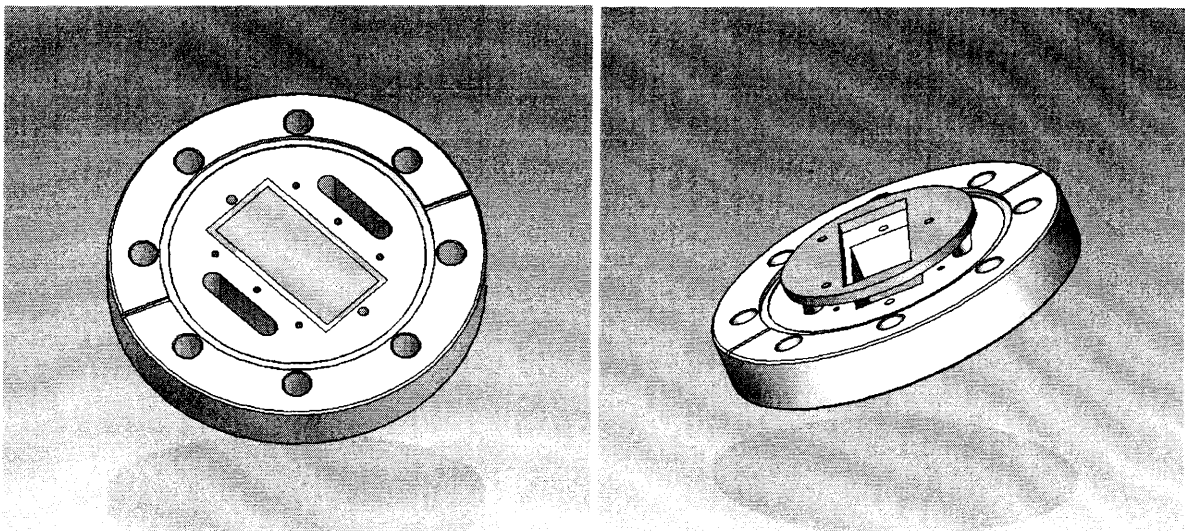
Filter holder assembly views front (left) and back (right). The filter holder is seen in the front view, while the blank is seen in the back view. The six regularly spaced holes around the rectangular section are for attaching the filter and blank; all other holes are bypasses.
